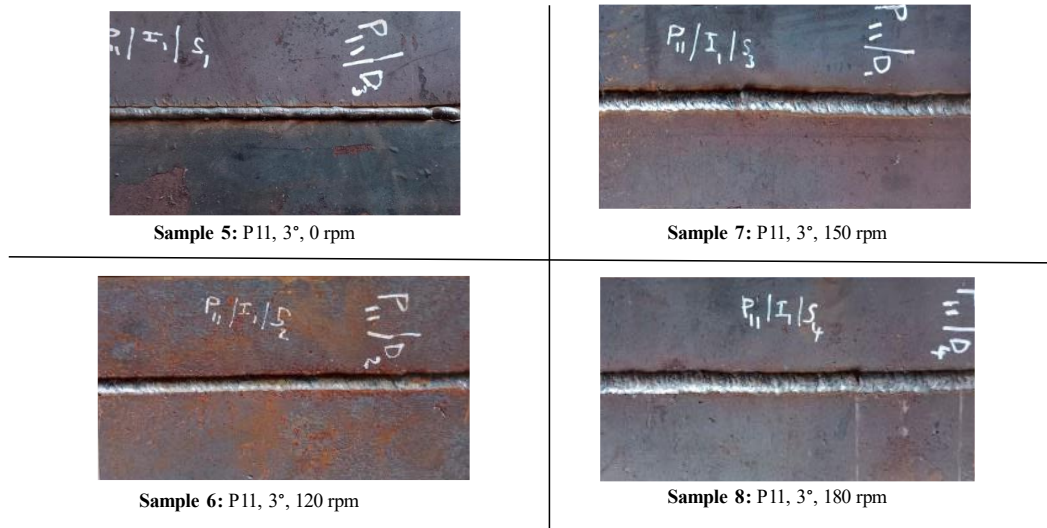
Welded specimens with 3° torch inclination
